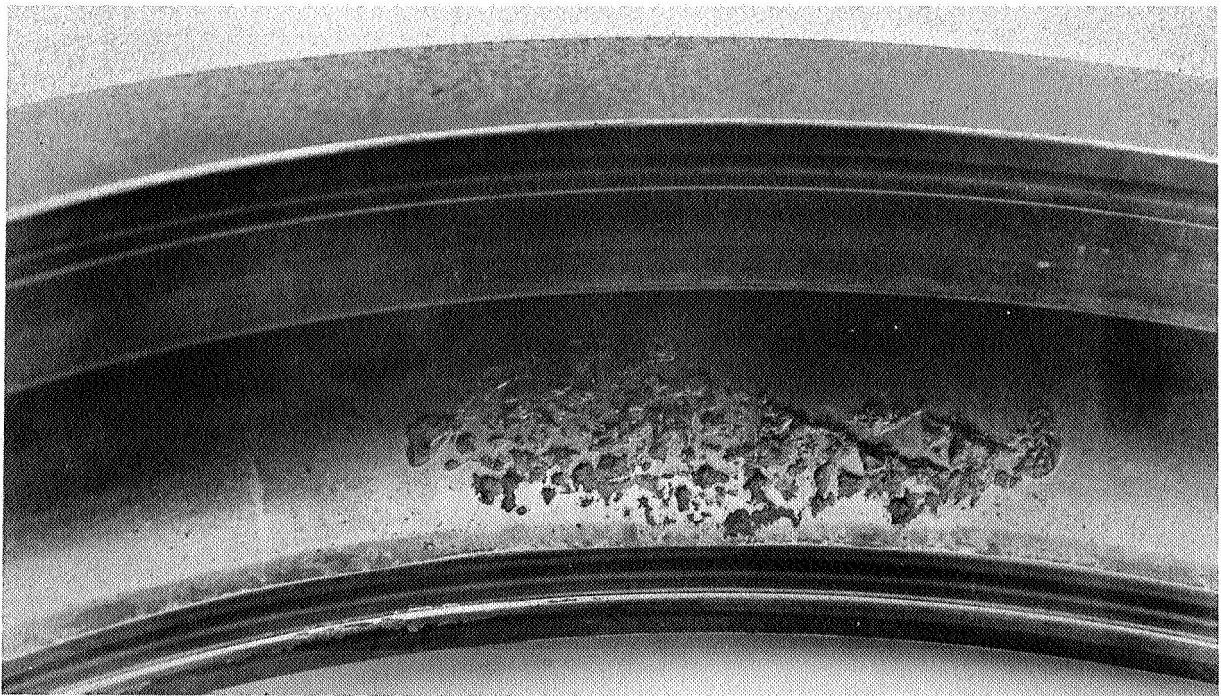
CAGE FAILURE - BEARING S/N 51
